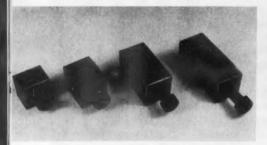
Various sizes of adjustable spacer blocks which allow for accommodating a wide range of stock sizes in a power hack saw vise with pivoting type of movable jaw.
